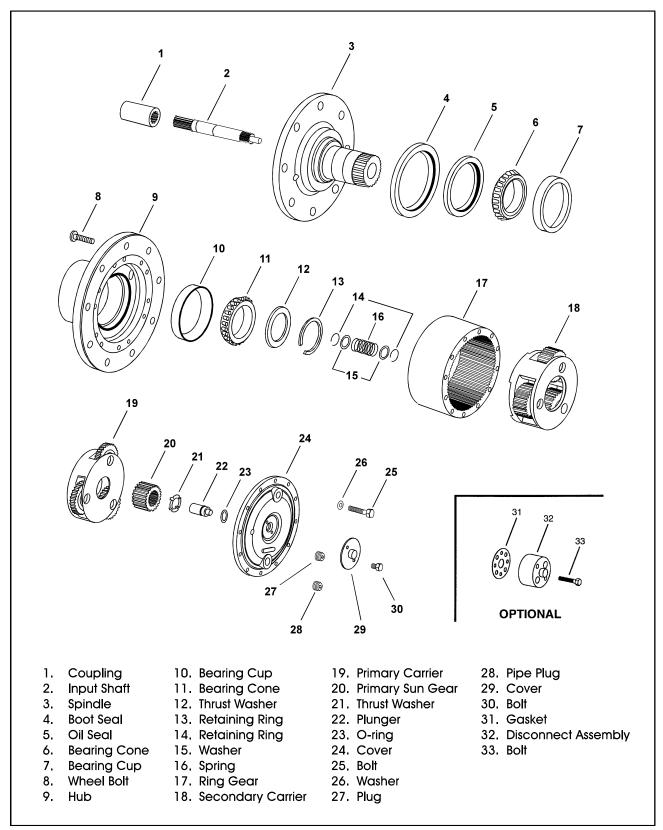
Torque Hub, Drive (Auburn Gear)
